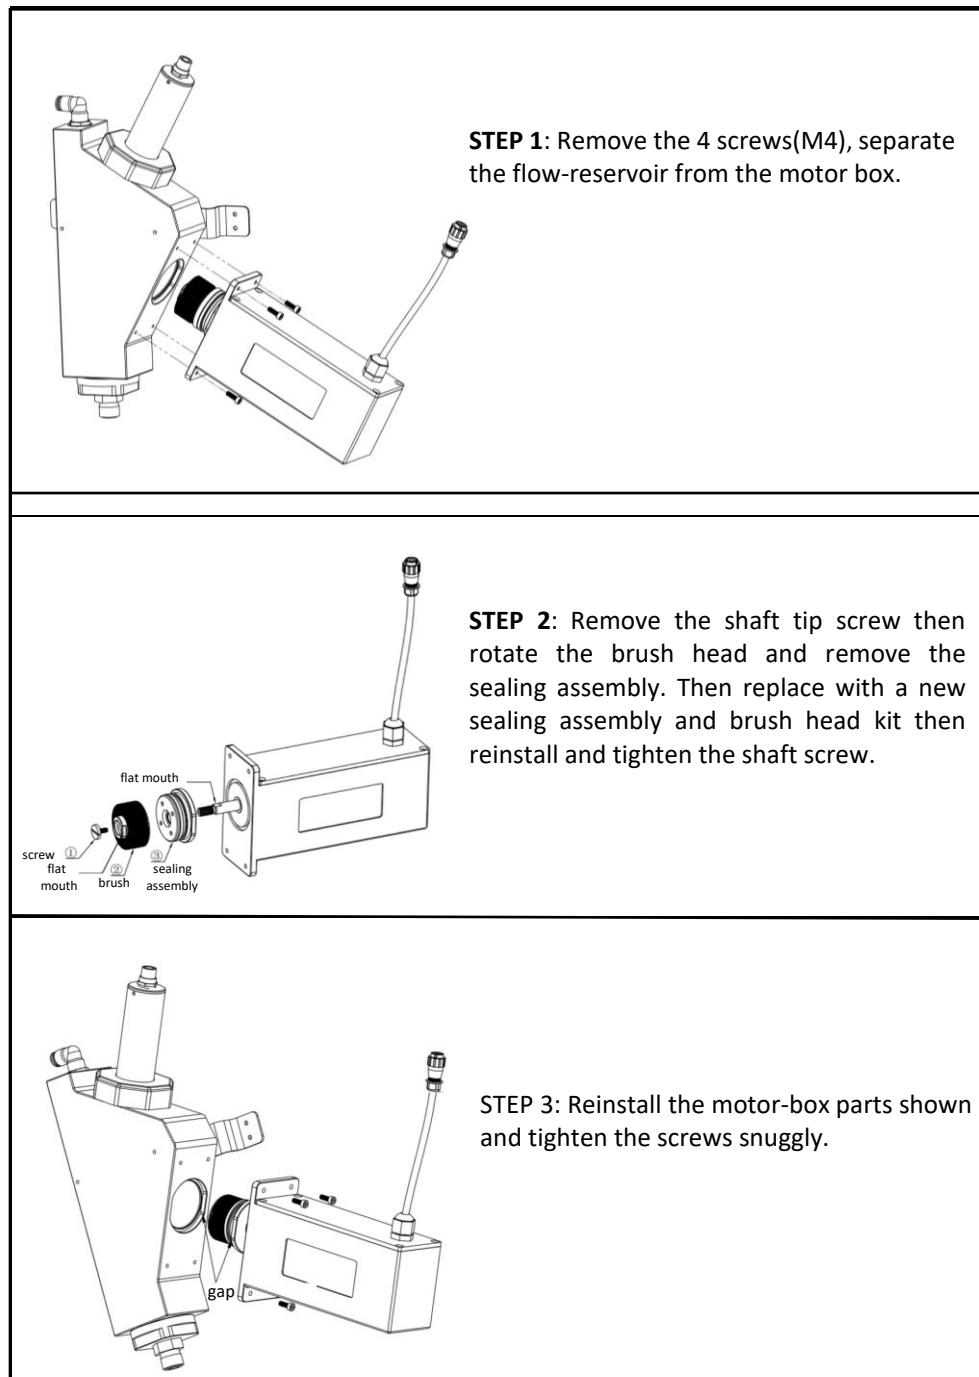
Replacing FT-100-PLUS Brush & Seal Assembly
